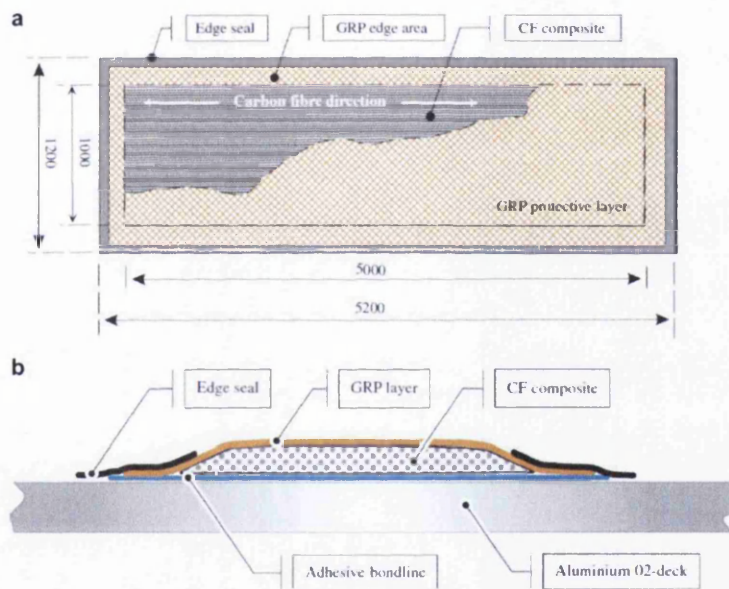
Doubler patch repair as used by [33], a) the patch components and dimensions, b) cross sectional view of the patch [33]
